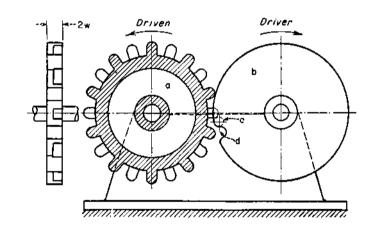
An intermittent drive with a cylindrical lock. Shortly before and after the engagement of two teeth with driving pin d at the end of the dwell period, the inner cylinder f is unable to cause positive locking of the driven gear. Consequently, a concentric auxiliary cylinder e is added. Only two segments are necessary to obtain positive locking. Their length is determined by the circular pitch of the driven gear.
